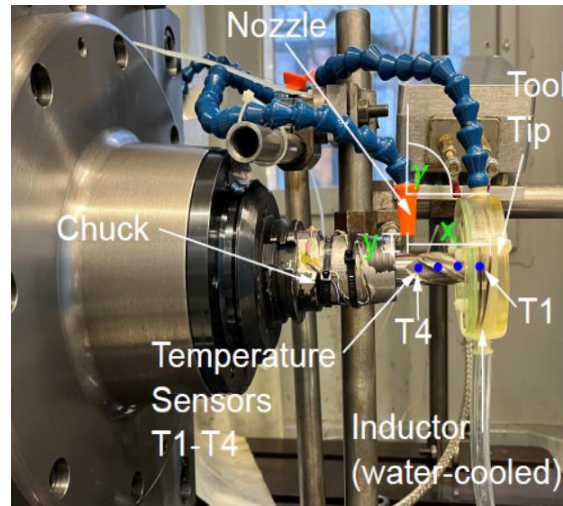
Test stand for investigating the thermal behaviour of spindle and tool
